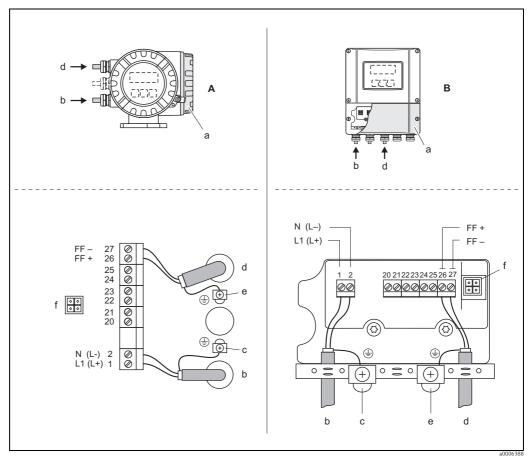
Connecting the transmitter, cable cross-section: max. 2.5 $\,mm^2$
